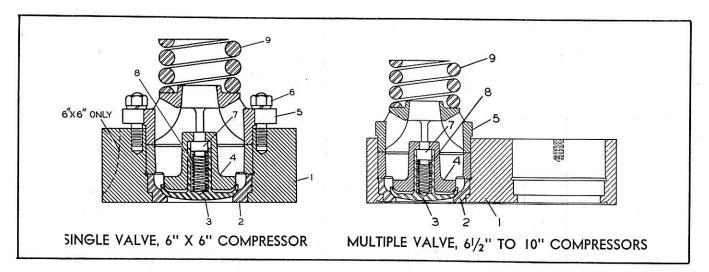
Discharge Valve, Y-27 Type - 6" to 10" Compressors
